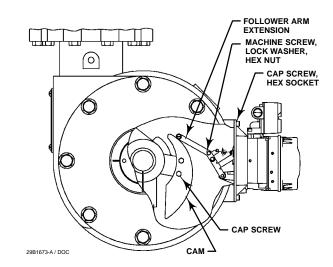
FIELDVUE DVC6020 SIS Digital Valve Controller with Long Feedback Arm and Follower Arm Extension Mounted on a Rotary Actuator
